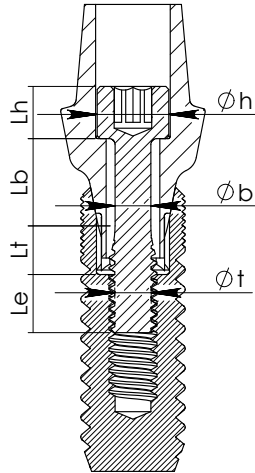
Cross section of an implant-screw-abutment assembly showing critical abutment screw dimensions
